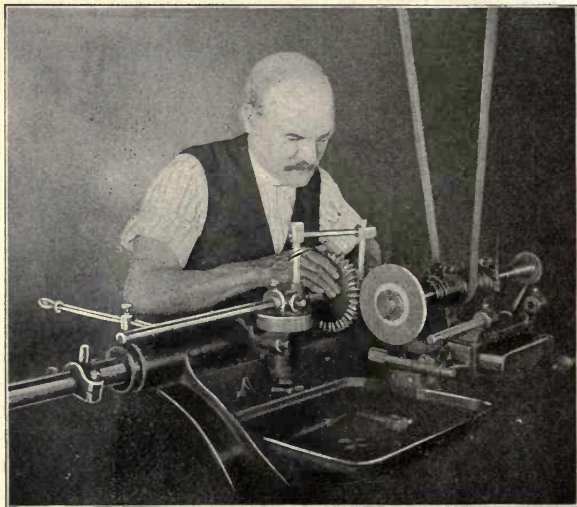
Grinding a milling cutter with the guide-finger over the tooth.
